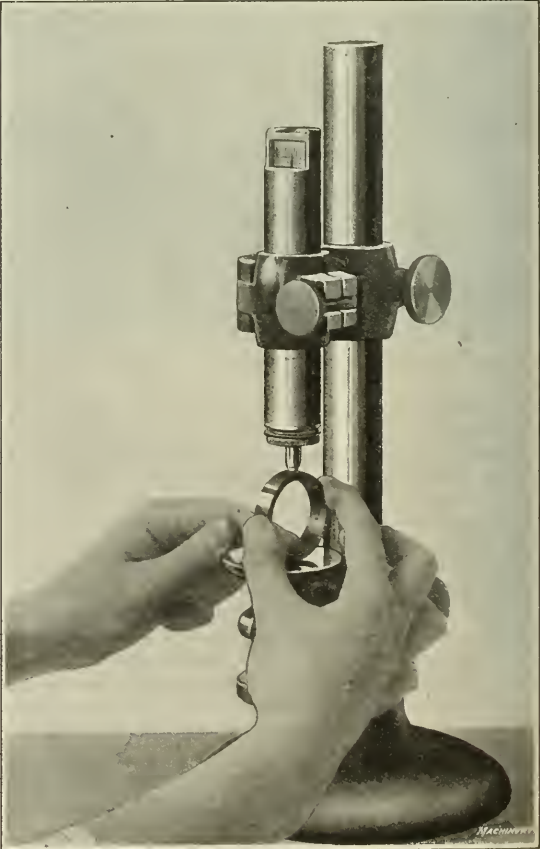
Hirth Minimeter set up and in Use for testing External Diameter of Ball Bearing Race Rings
